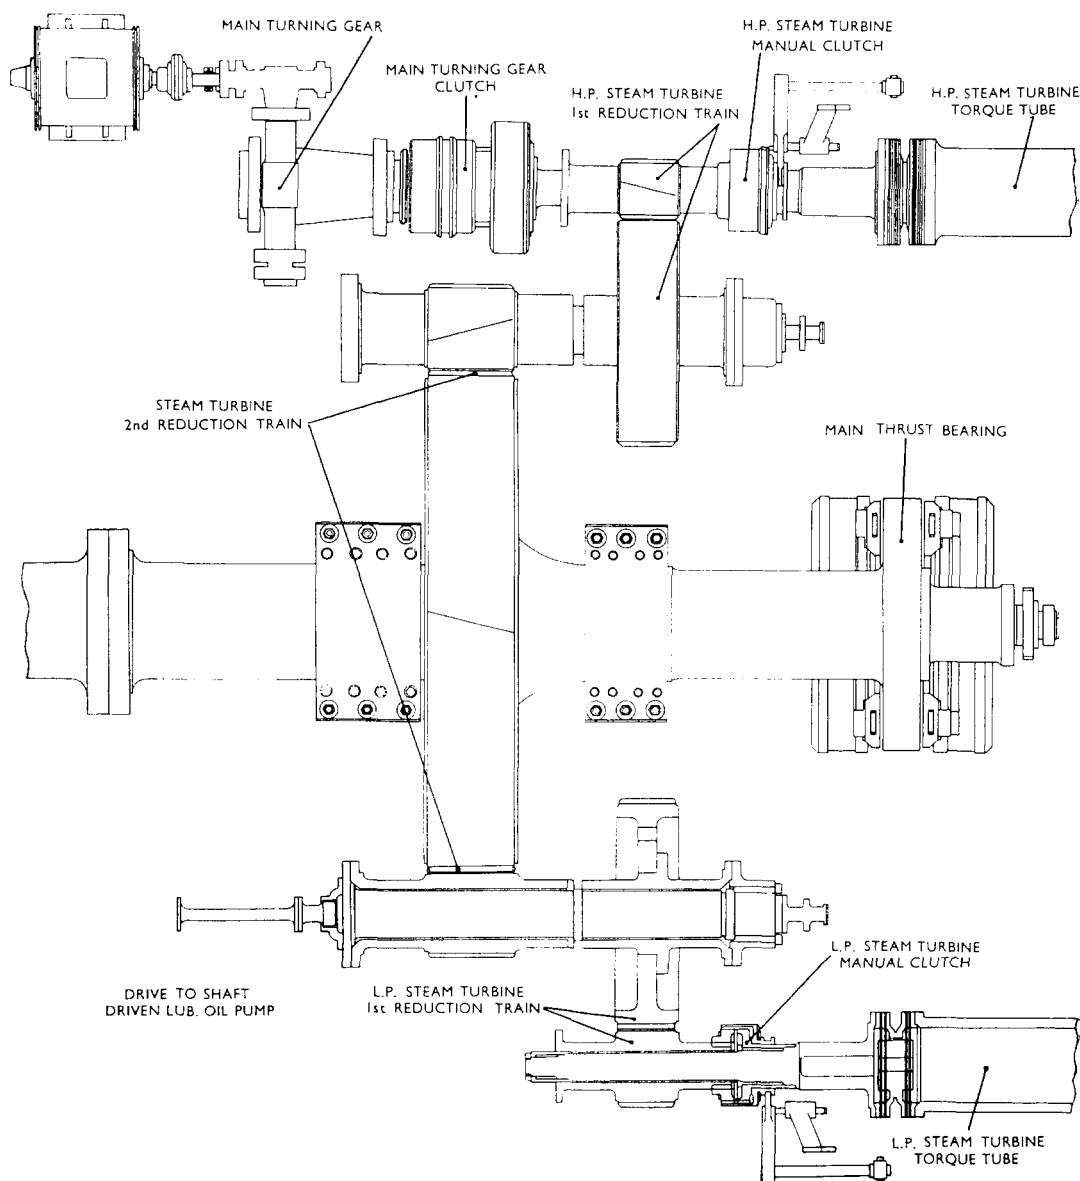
Y.102A—PORT GEARCASE STEAM TURBINE TRAINS
